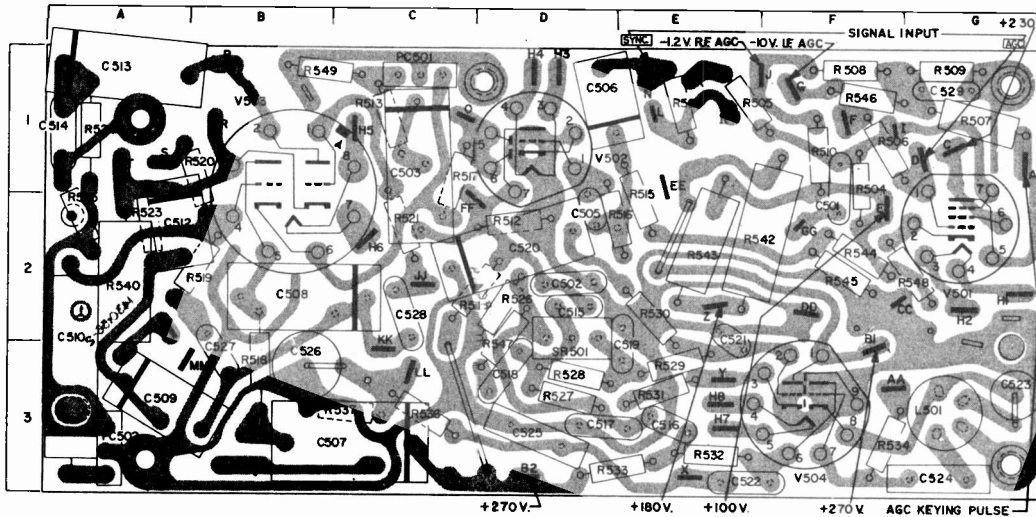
PW500 Sealed Circuit Deflection Assembly Composite Diagram (KCS137)
